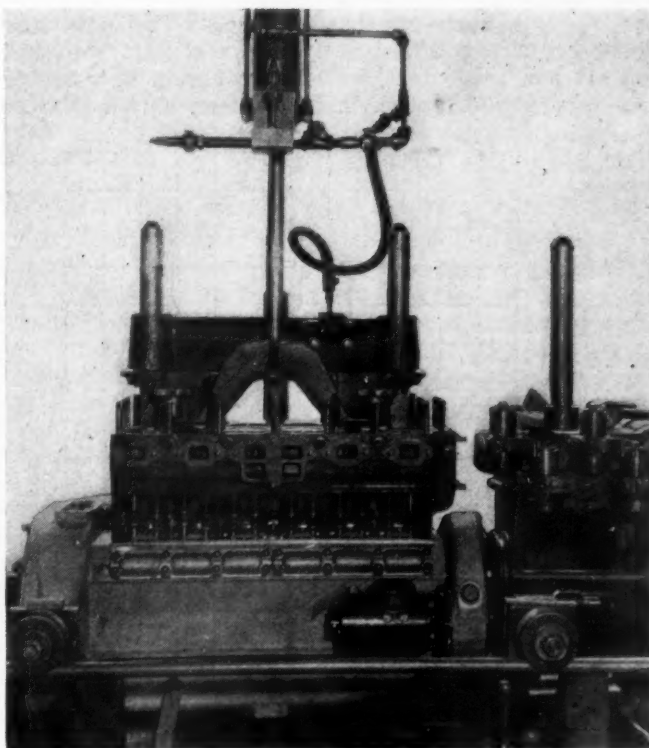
Final position just before removing hand nuts. Note flywheel lock pin and link at extreme left
